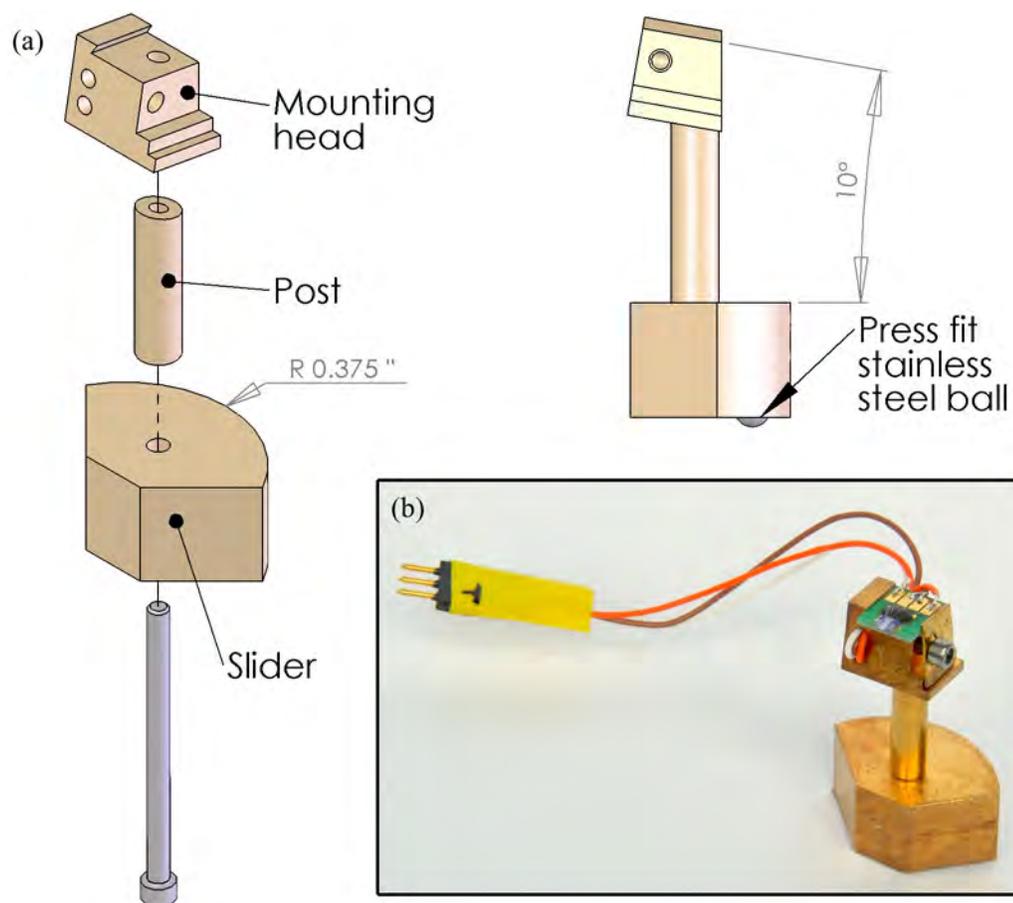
(a) (left) Exploded isometric projection of the cantilever chip mounting assembly and (right) side view of assembled tip holder. The angle of the chip mounting surface is offset by 10° with respect to the base slider to ensure the cantilever tip, rather than any other part of the cantilever chip, makes the first contact when tip and sample are brought into contact. (b) Photo of assembled holder and mounted cantilever chip. The cantilever chip is clamped in place with the small brass shim on the right hand side of the assembly. Three AWG 32 wires soldered to the cantilever chip lead to a Microtech connector and provide electrical connections to the cantilever and balance resistors.
